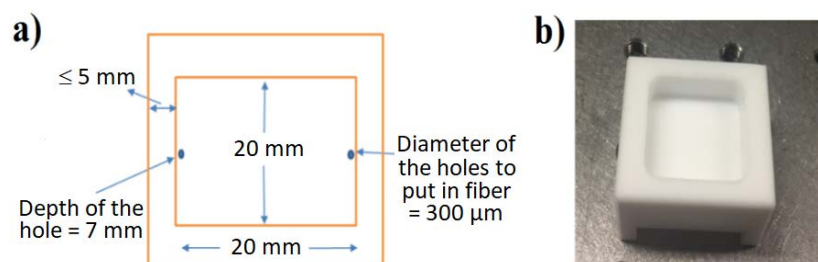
Mold used for the measurements: a) scheme of the mold with dimensions; b) image of the mold.
